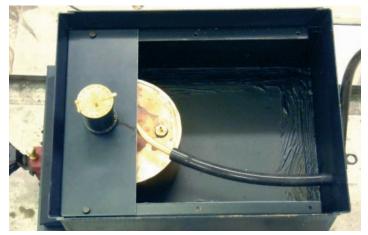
A larger fuel tank is made and mounted in the tender, which is sealed for a water bath.
